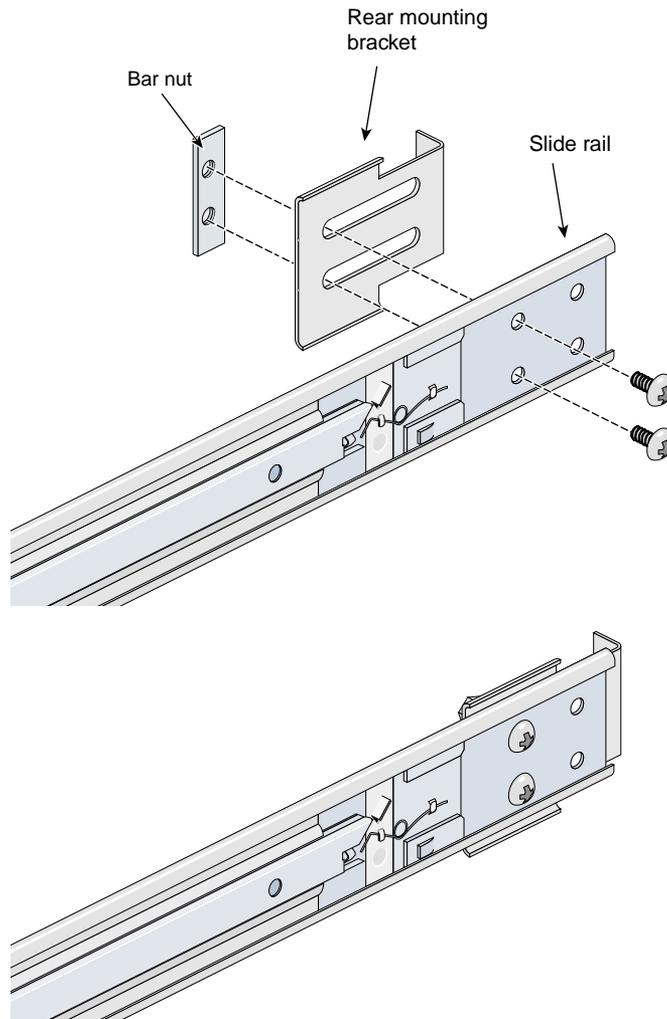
Attaching the Rear Mounting Bracket to the Slide Rail
